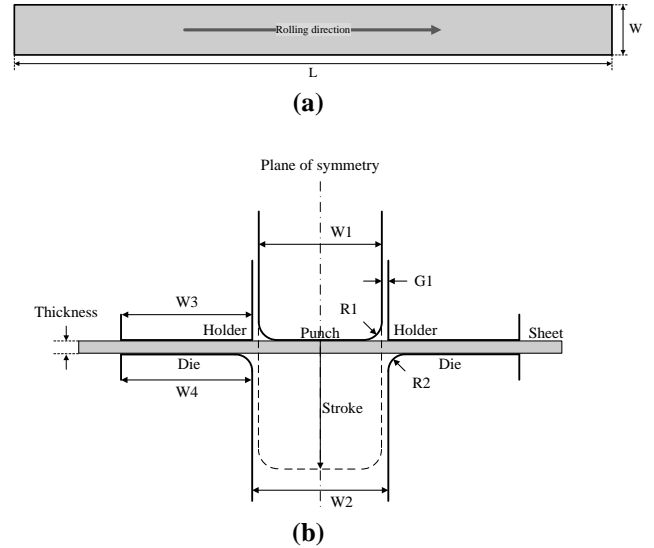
Schematic view of specimens and tools and their dimensions for the 2-D draw bending test: (a) base specimen and (b) tools
